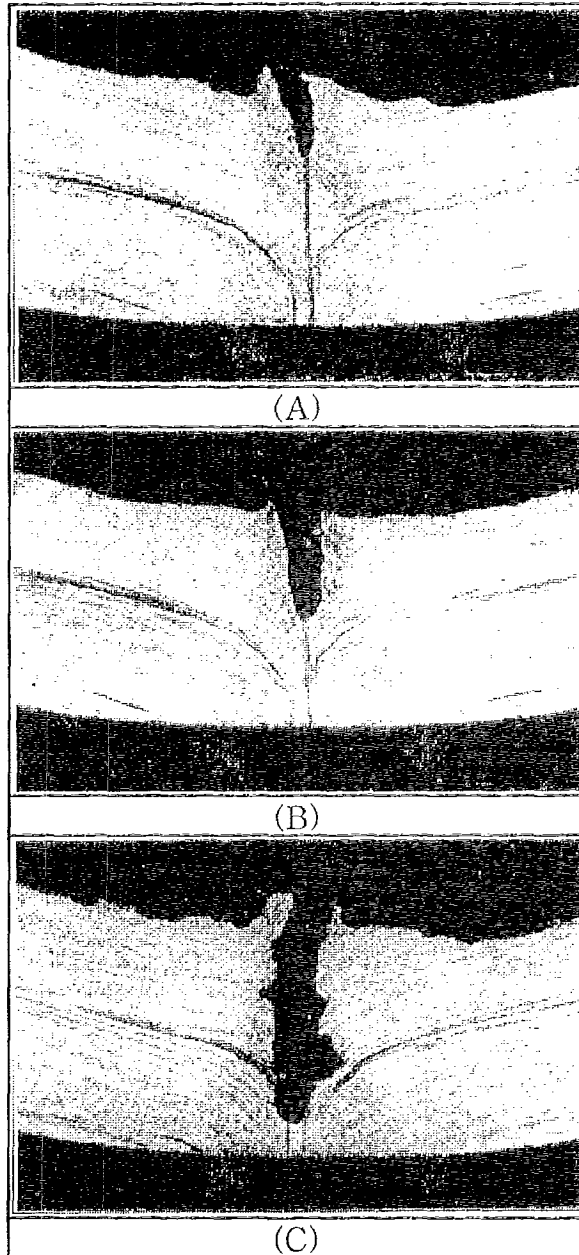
Cross sectional view of corroded ERW carbon steel pipe; (A) slightly corroded (B) corroded, (C) heavily corroded and leaked.
